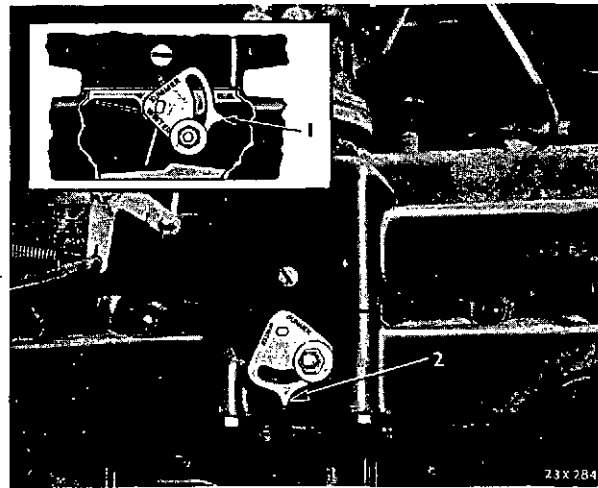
Position of Universal Manifold Heat Control Valve Counterweight for Downdraft Intake and Rear Exhaust and Updraft Intake and Front Exhaust
